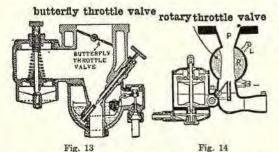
The throttle is placed in the mixture outlet, and the form that is shown is called a "butterfly valve." It is a disk of metal turning on pivots, so that it acts like the damper of a stove pipe. When wide open, the butterfly valve is edgeways to the flow of the mixture, but even in this position it presents resistance to the flow, which is something that should be avoided.
